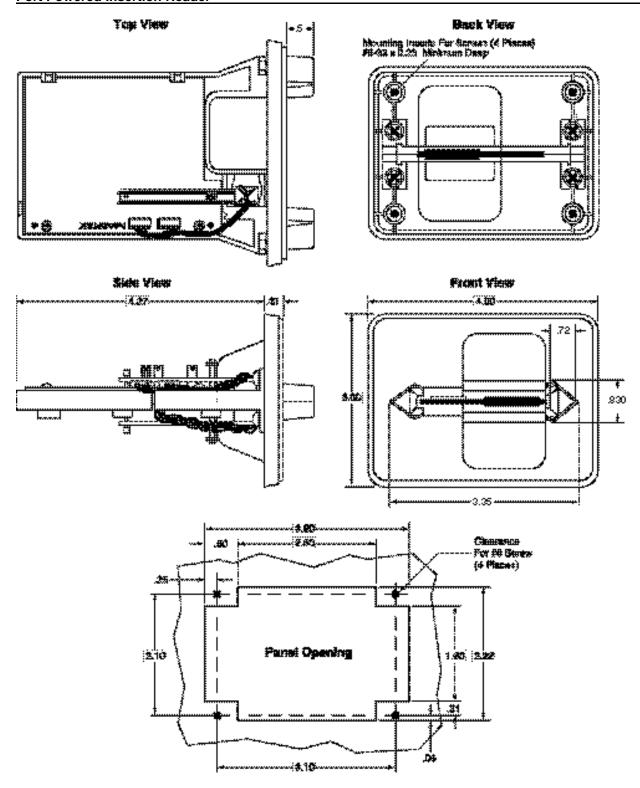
MagTek Extended Bezel Mounting Dimensions
